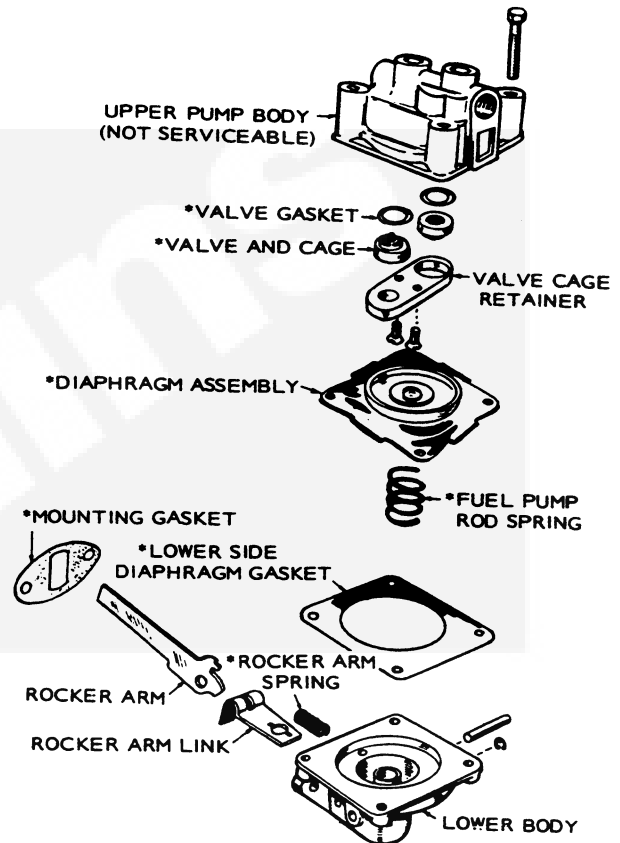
MECHANICAL FUEL PUMP - EXPLODED VIEW
